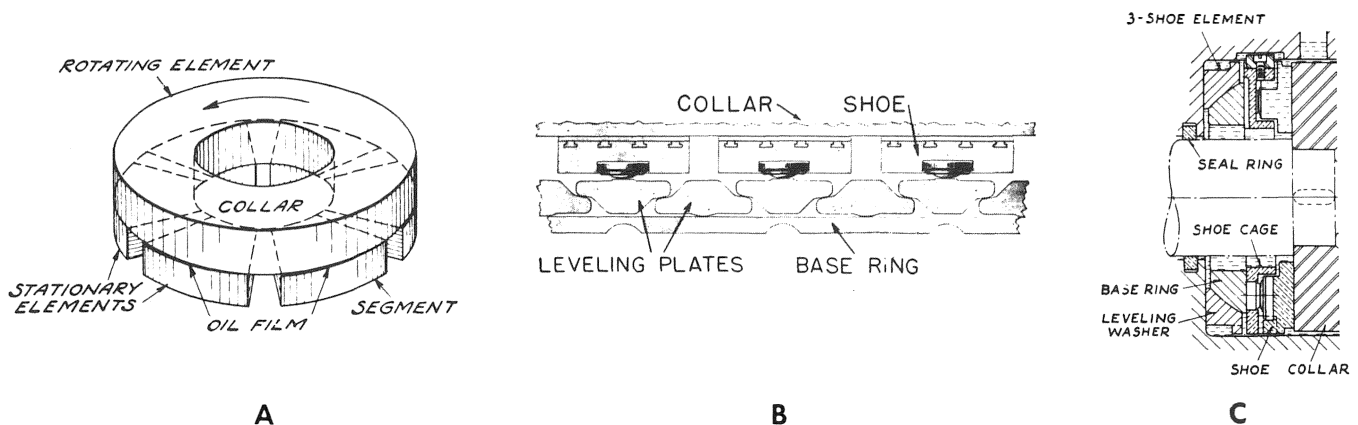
(a) Schematic Thrust Bearing; (b) Equalizer System; (c) Spherical seat arrangement. (Courtesy of Kingsbury Machine Works, Inc.)
